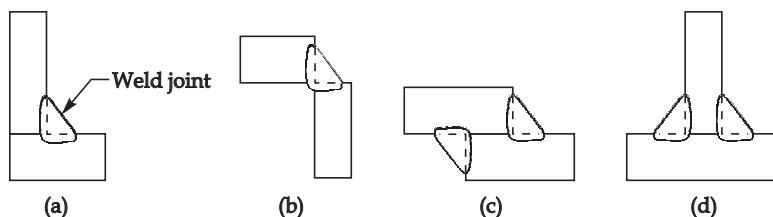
Various forms of fillet welds: (a) Inside single fillet corner joint; (b) outside single fillet corner joint; (c) double fillet lap joint; and (d) double fillet tee joint.
